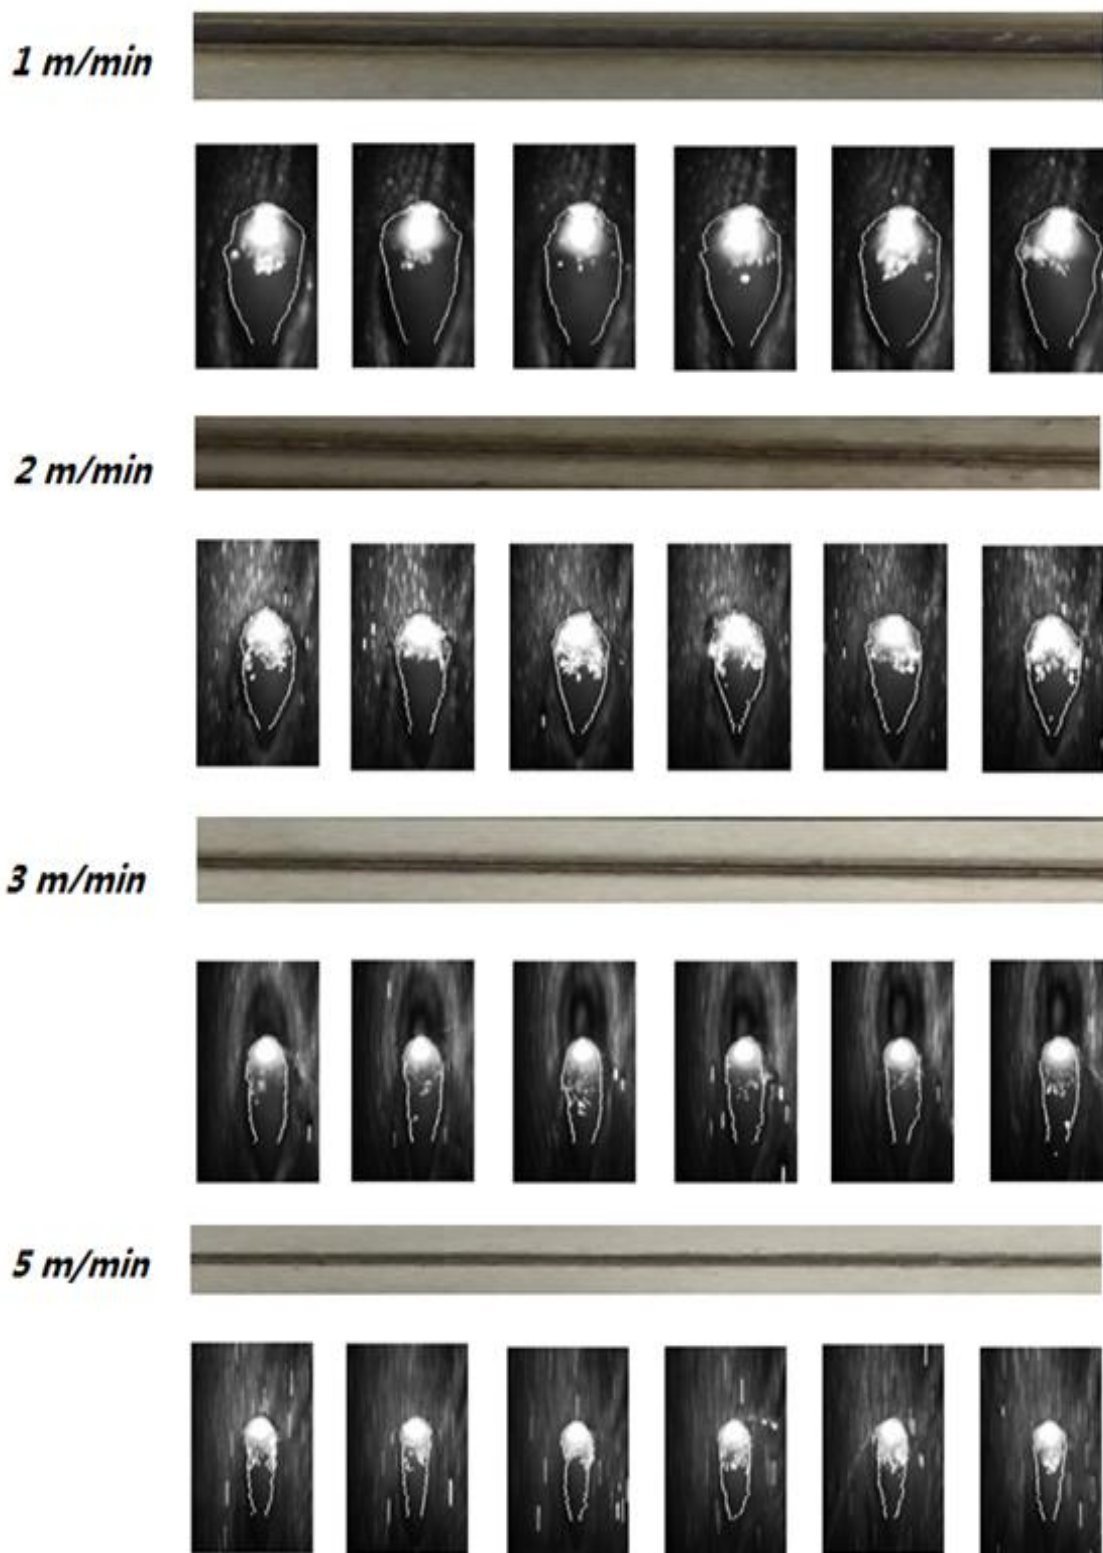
Real weld seam and corresponding extracted weld pool geometry.
